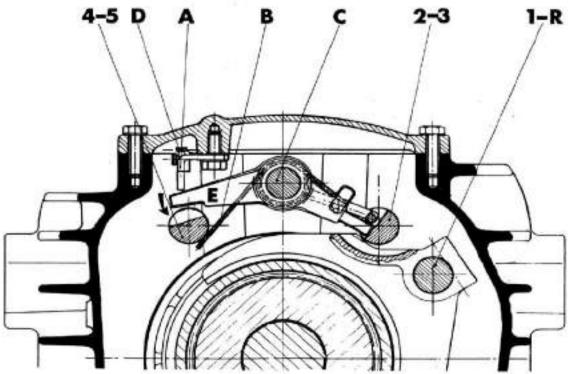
shows the inner selector lever in neutral position of 4th and 5th gear plane. All gears can be engaged from this position without difficulty.
